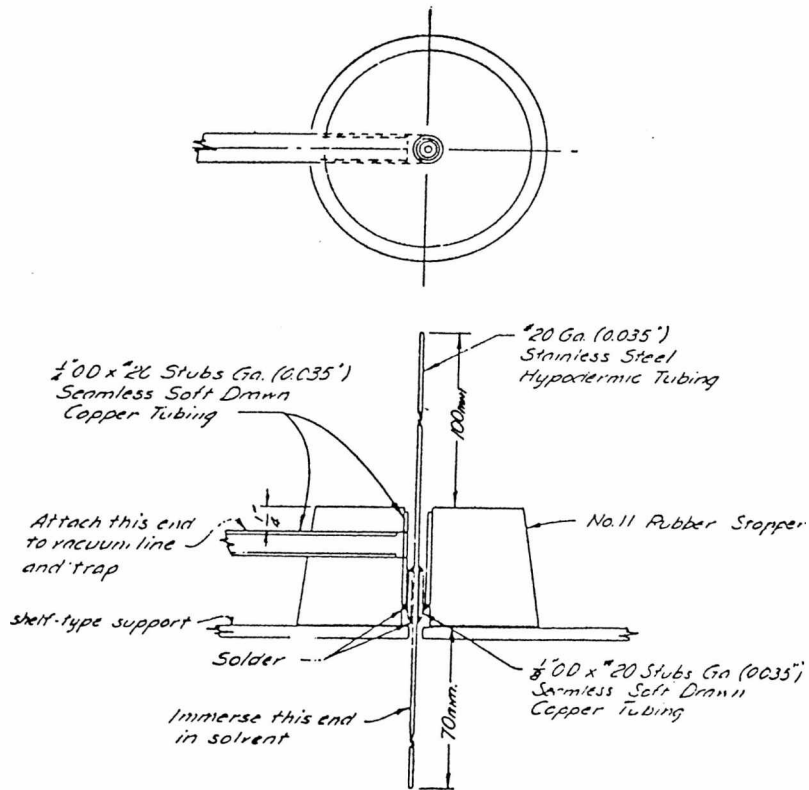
Cleaner Assembly for Bingham-Type Pycnometer.
